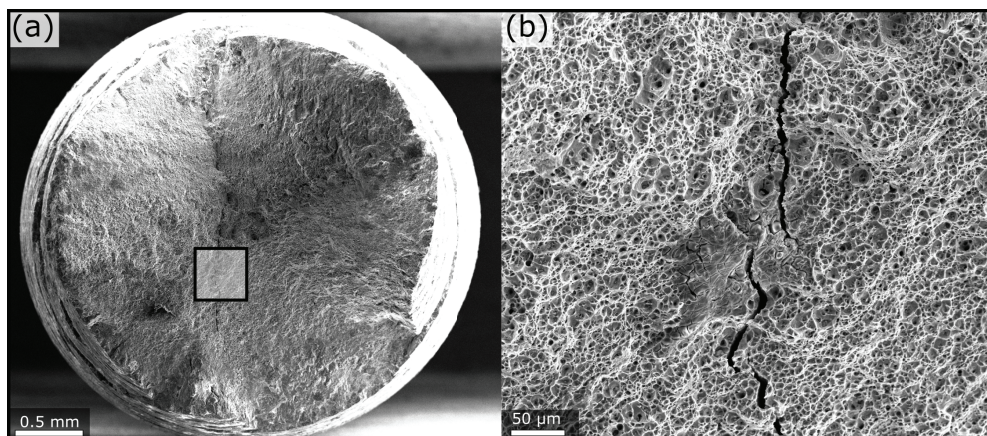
Fracture surface for sample H-AC-T6, demonstrating a crack penetrating the entire cross-section.
